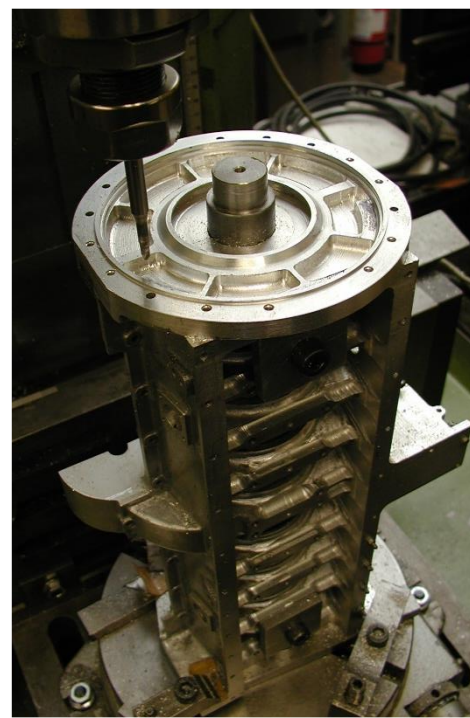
Machining The Detail Within The Gearbox Mounting Flange
